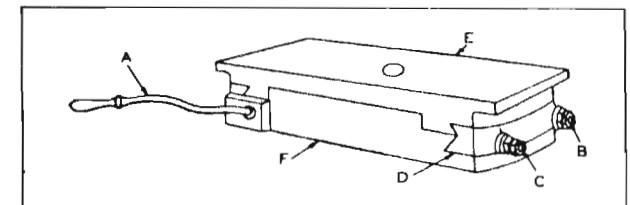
Swivel-type Fixture Equipped with Locking Mechanism Shown in Fig. 3
